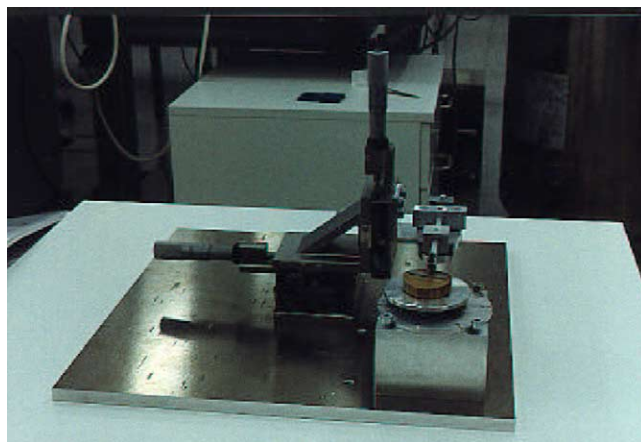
Probe shaper tool required to reduce the size of the tip during probe conditioning.
